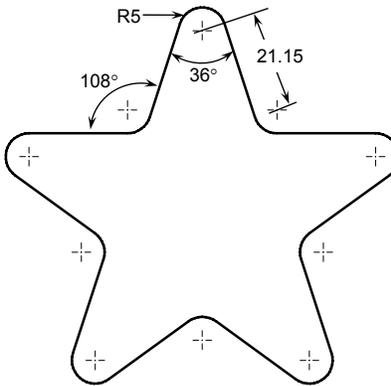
Sample star-shaped cavity (dimensions in mm).
